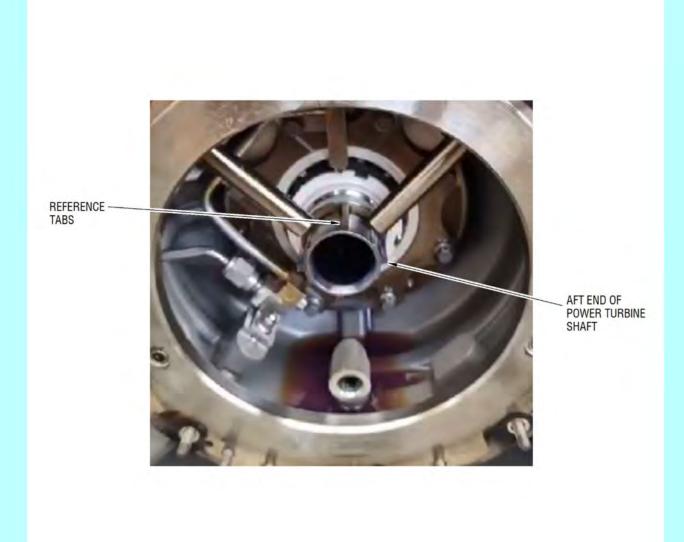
C-Sump and Aft End of Power Turbine Shaft
